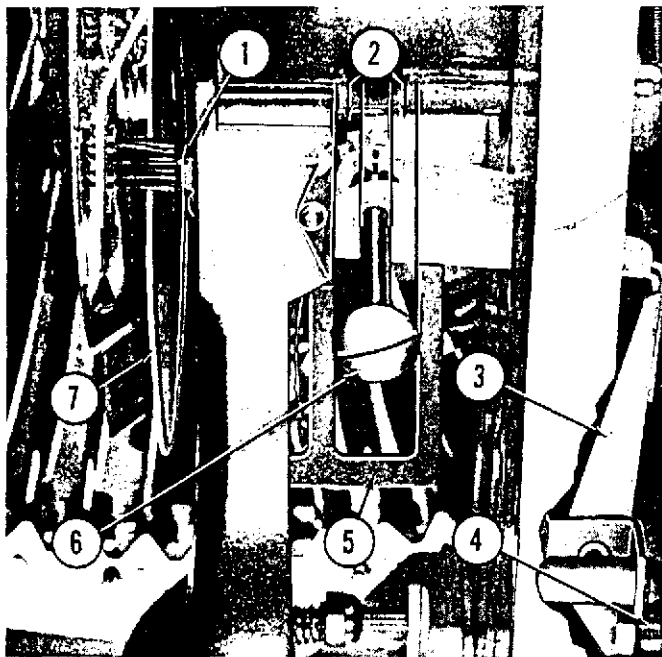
TONE ARM LATCH BRACKET CLEARANCE
